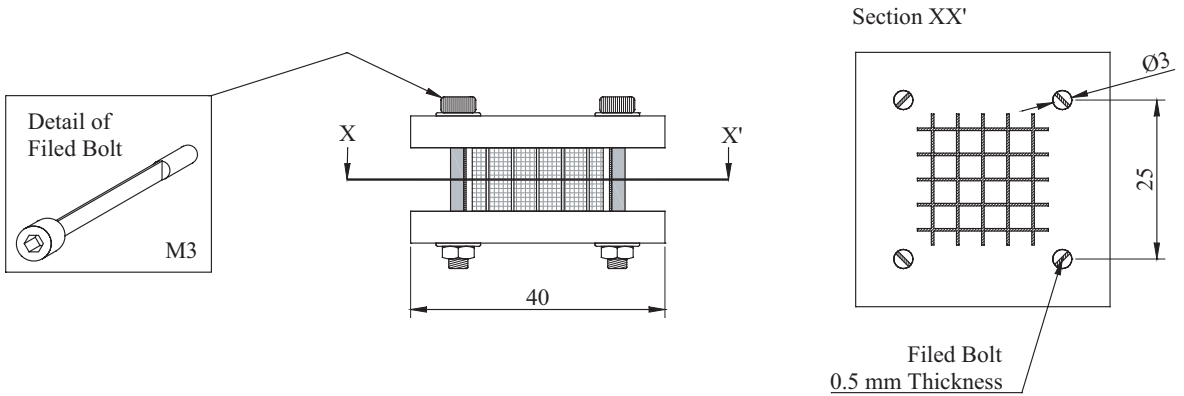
Sketch of the fixture used to compress the specimen used and then scan in X-ray tomography system. The fixture prevents unloading of the specimen when it is removed from the test machine.
